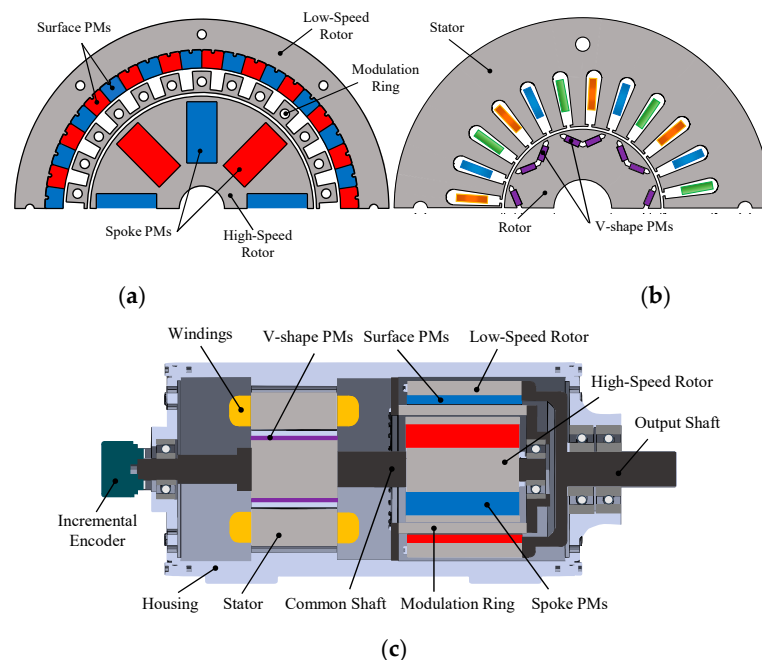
Structure of the proposed IGDU: (a) CMG configuration, (b) IPM motor configuration, (c) cross-sectional view of the mechanical design.
